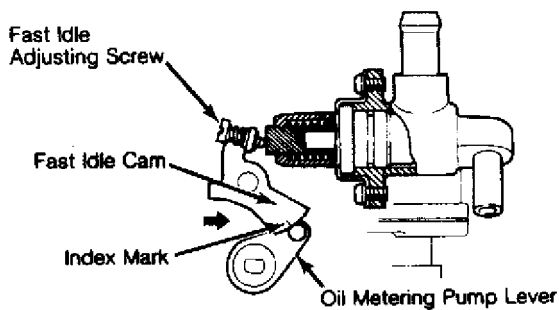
Checking Oil Metering Pump Rod Clearance on 1.3L Engine
